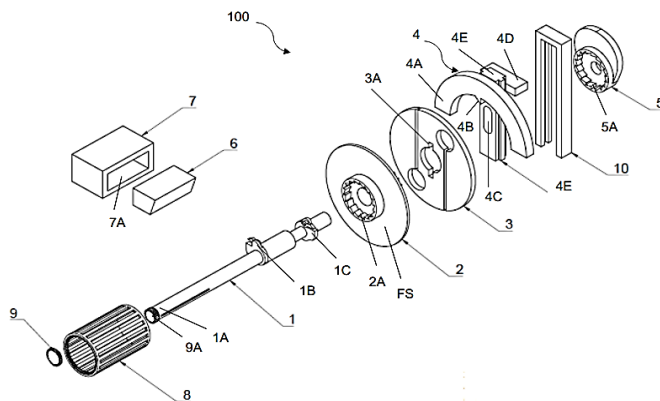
A : Illustrates exploded perspective rear view of a mechanism for locking a seat belt in a vehicle;
